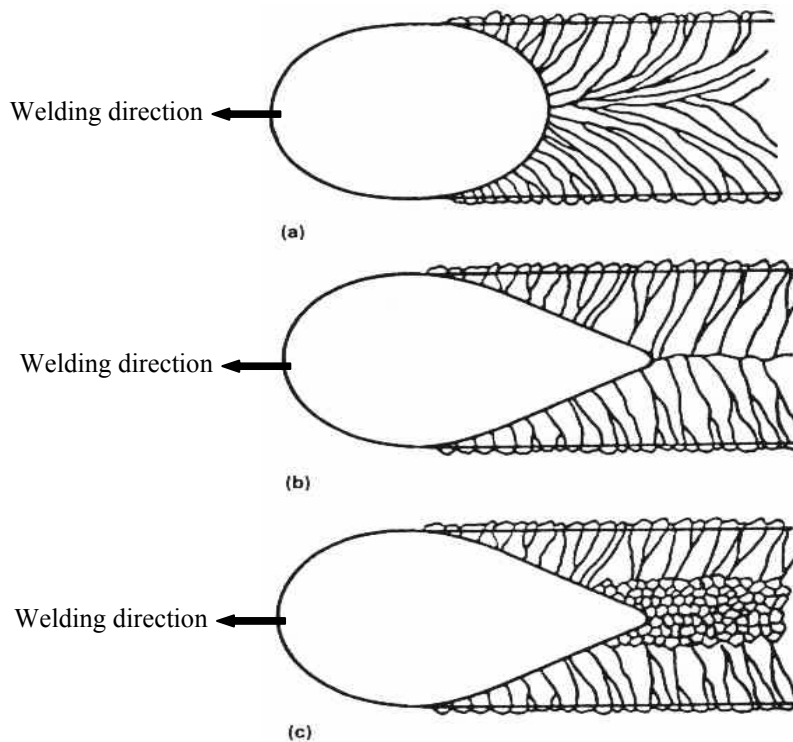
Effects of heat input and welding speed variations on weld pool geometry and microstructure. (a) Low heat input and low welding speed producing an elliptical weld pool. (b) Medium heat input and medium welding speed producing a tear-drop shaped welding pool. (c) High heat input and high welding speed producing heterogeneous nucleation at weld pool centerline (ASM, 2002)
